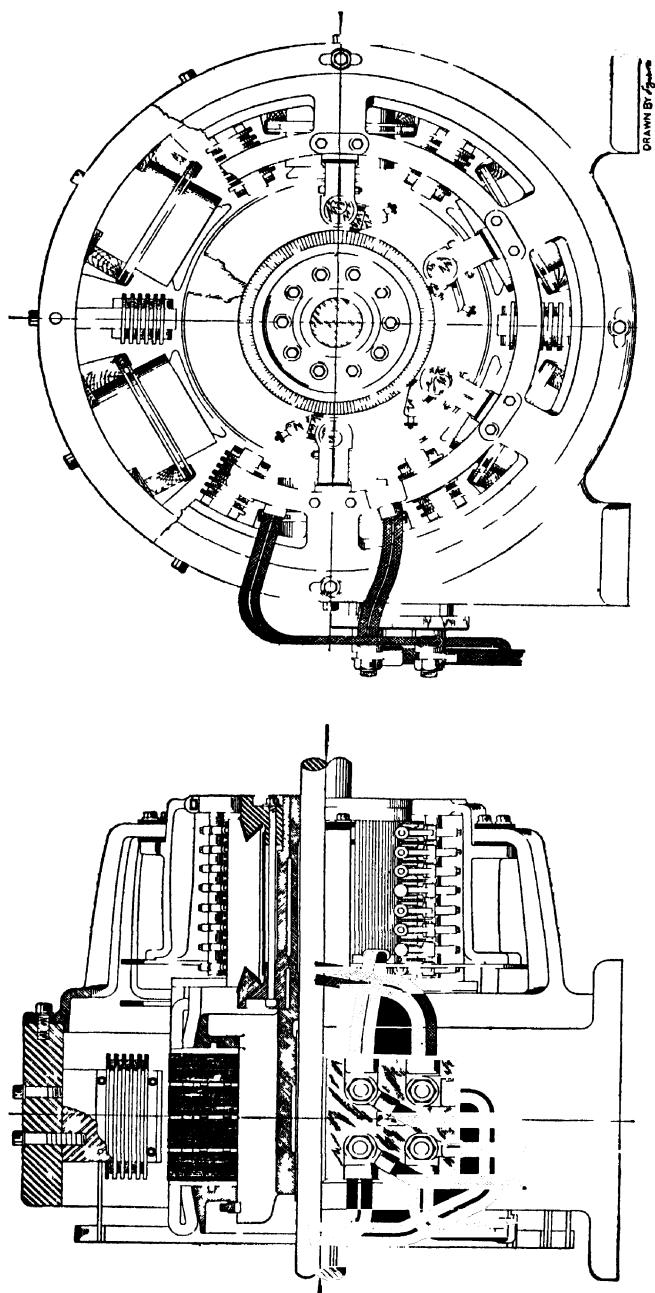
Assembly drawing of direct-current generator, 300 kw, 900 r p m, 250 volts
